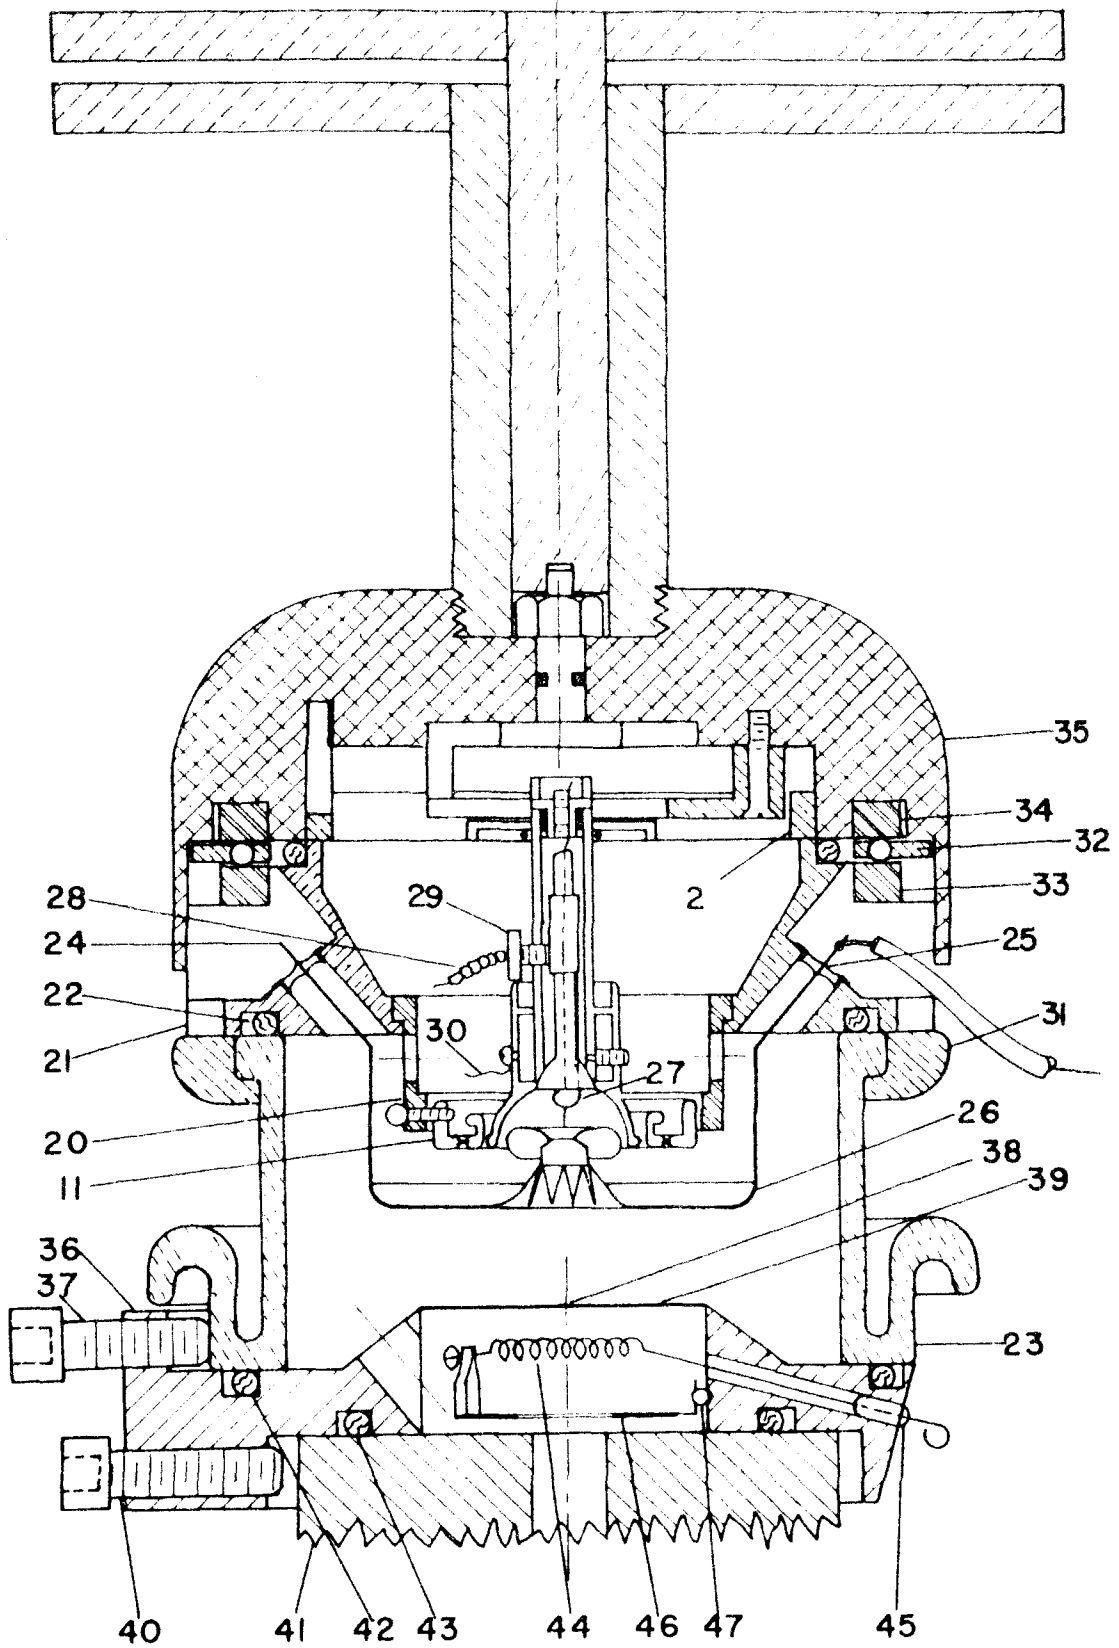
FIG. (b) Sectional view of the complete field emis. on cathode assembly.
